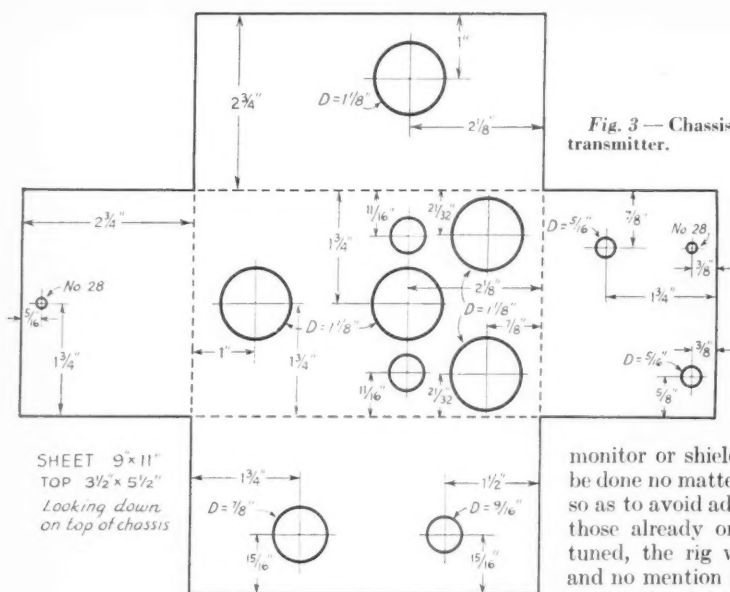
Chassis layout for the QSL Push-Pull transmitter.
